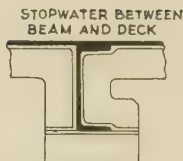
Typical stapling around beam piercing riveted bulkhead.
